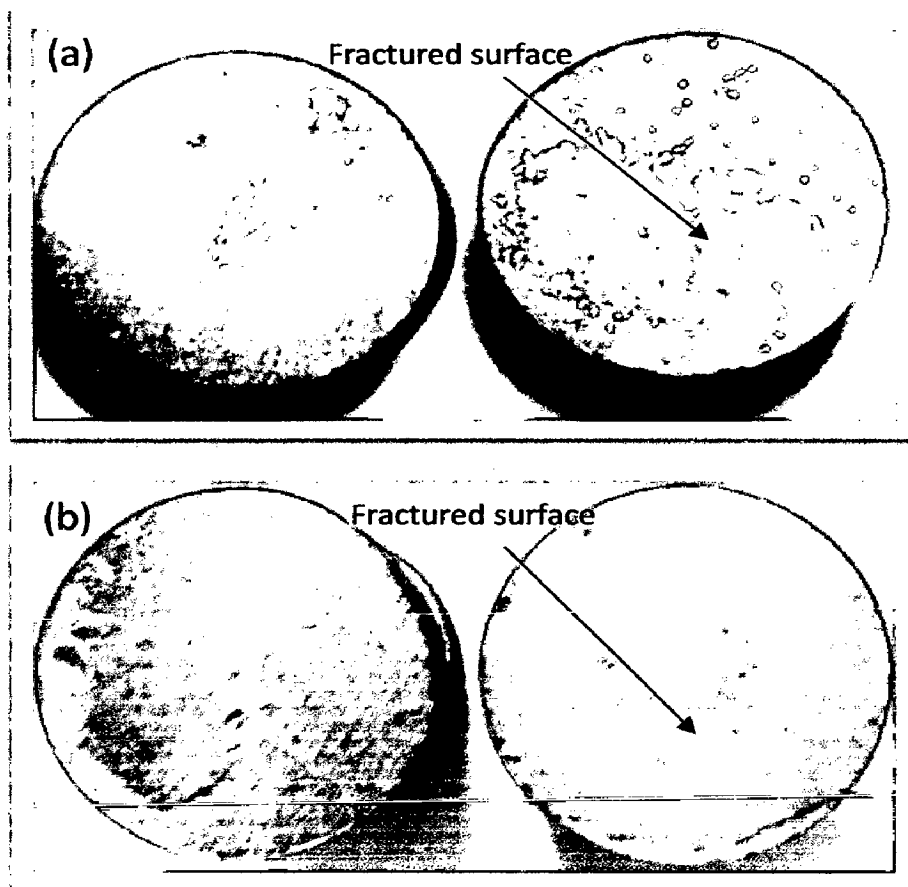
Fracture surfaces of a Plasma sprayed gas nitride specimen after ASTM C633 tensile test; (a) Conventional TiAlN coating, (b) Conventional AlCrN coating
